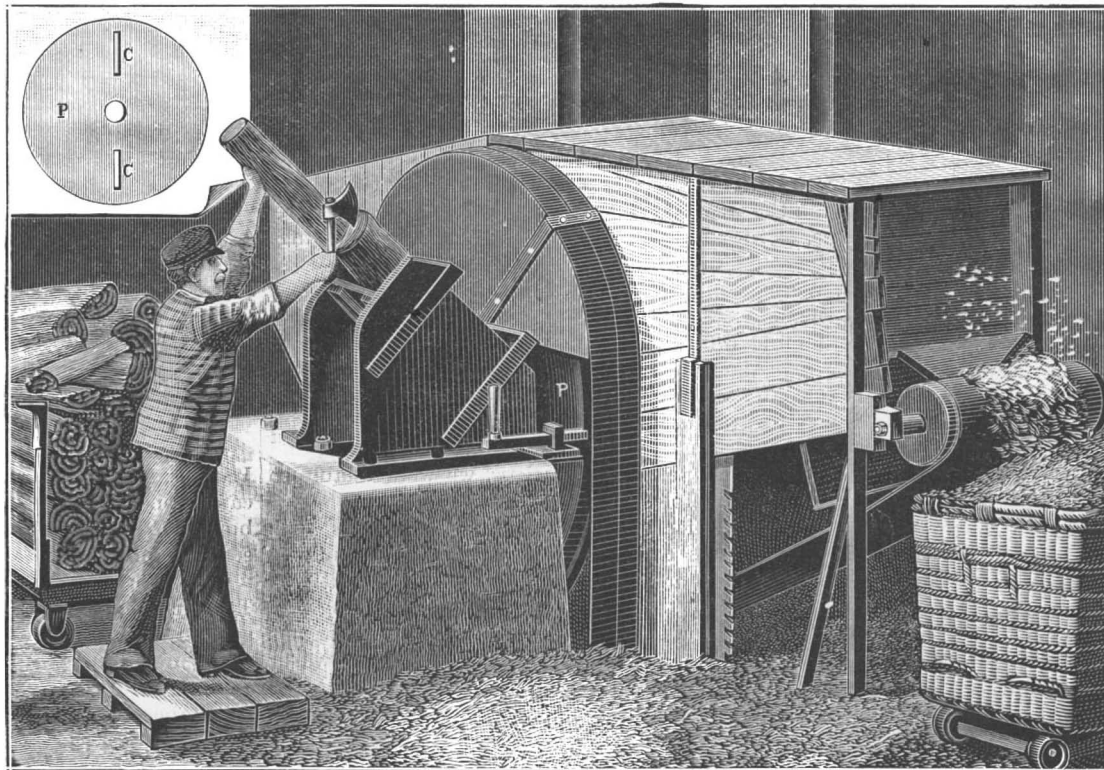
MACHINE FOR CUTTING WOOD IN THE MANUFACTURE OF CELLULOSE.
